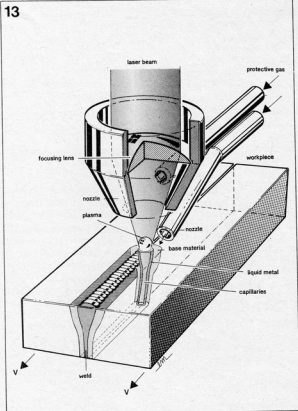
Illustrating the operation of a CO₂ laser in industrial welding.
